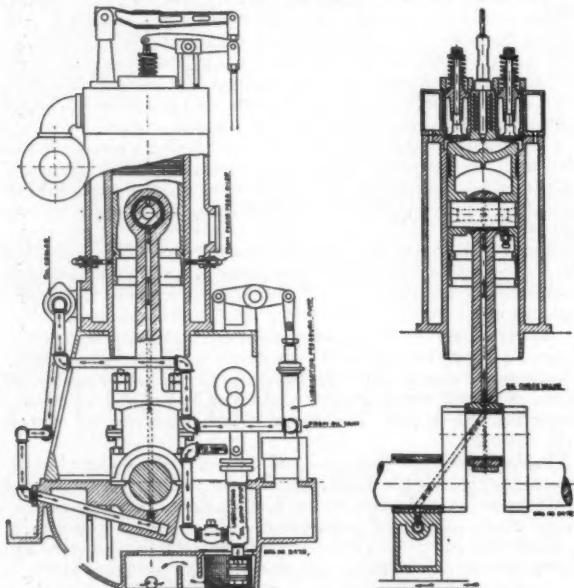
Diagram showing path (indicated by arrows) of lubricating oil through engine.
